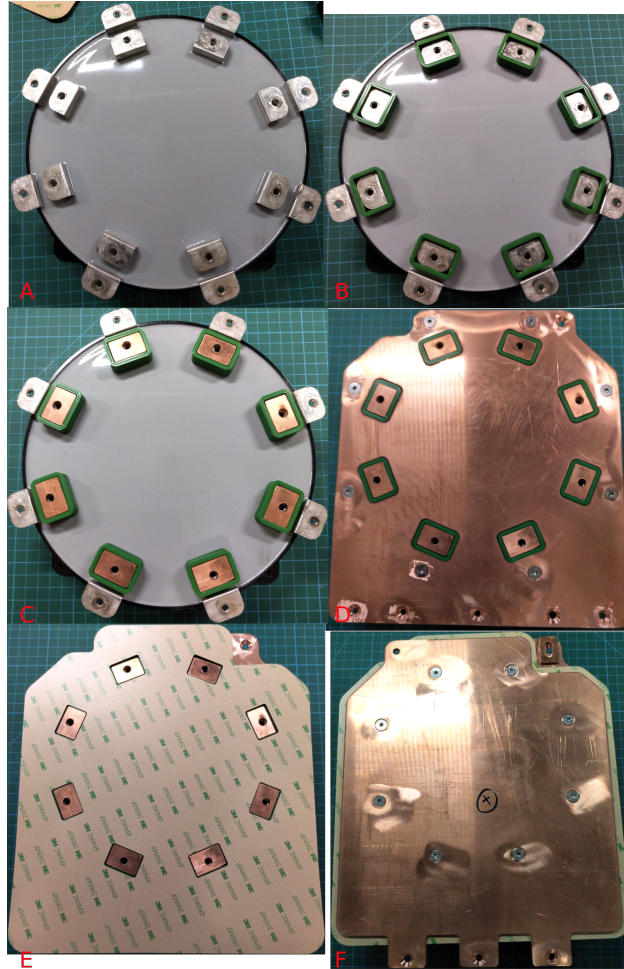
DC Link Bussing Assembly layers. A, Capacitor; B, terminal insulators; C, terminal spacers; D, DC+ copper plate; E, PEI insulator (protective backing still attached); F DC- copper plate.
